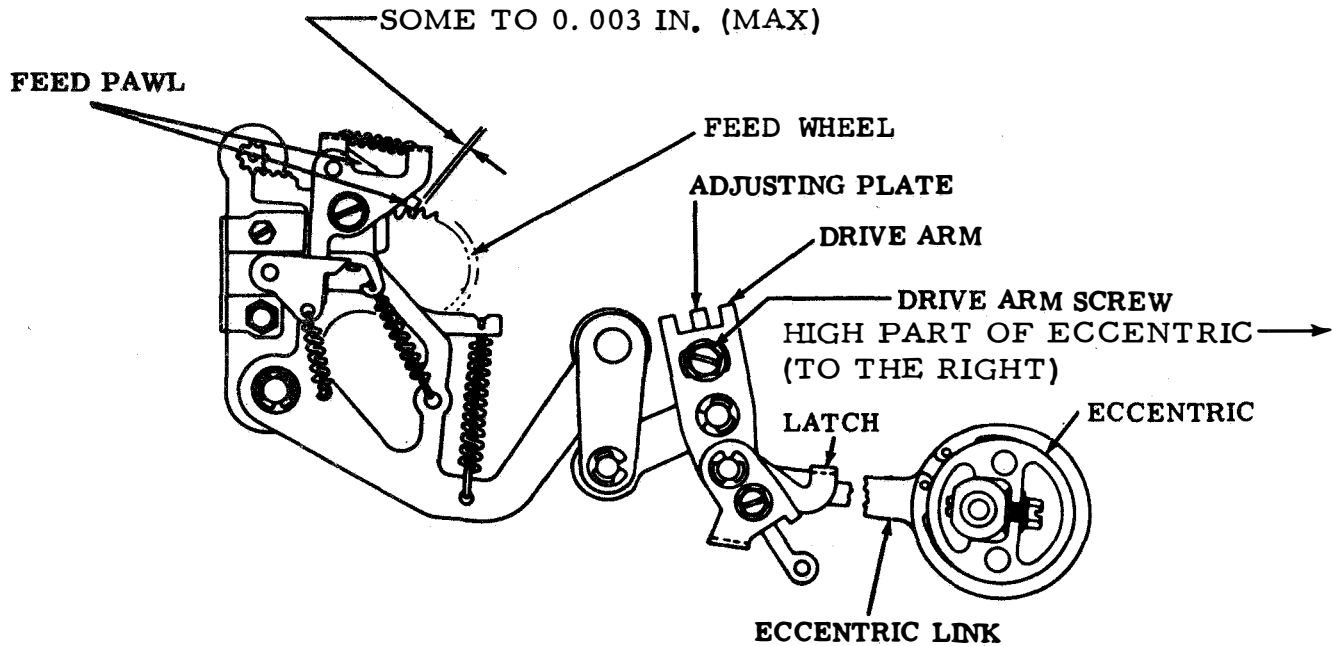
Drive Arm for Chadless Tape, Perforator
